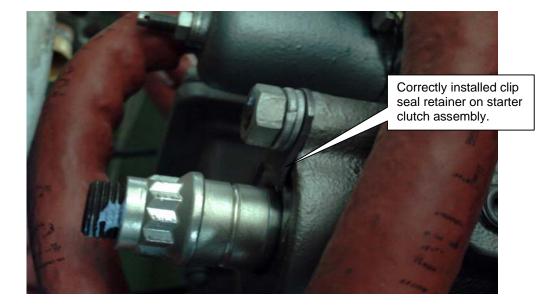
showing starter clutch assembly without optional air-conditioning drive.
